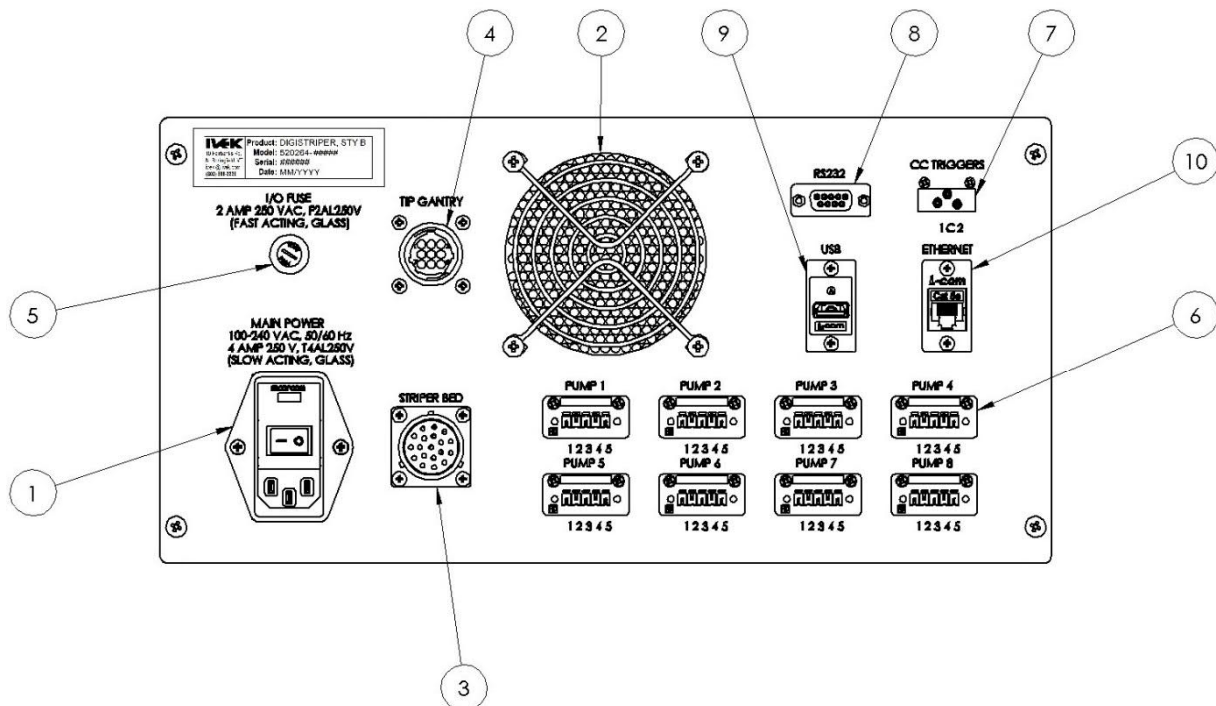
Digispense Striper Style B Controller Module Rear Panel
